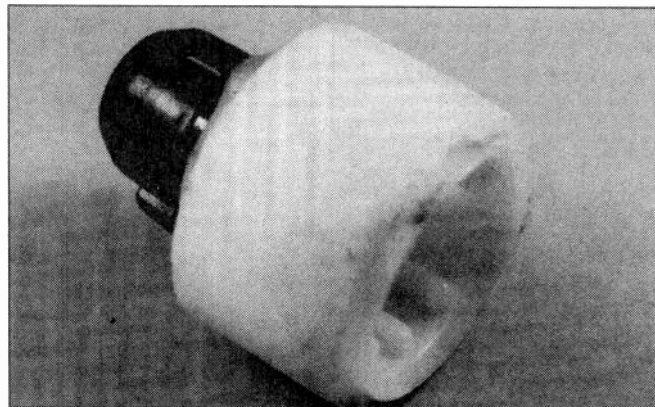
DIY extension piece for use with a torque gauge in certain 'awkward' cassette cradle designs.
